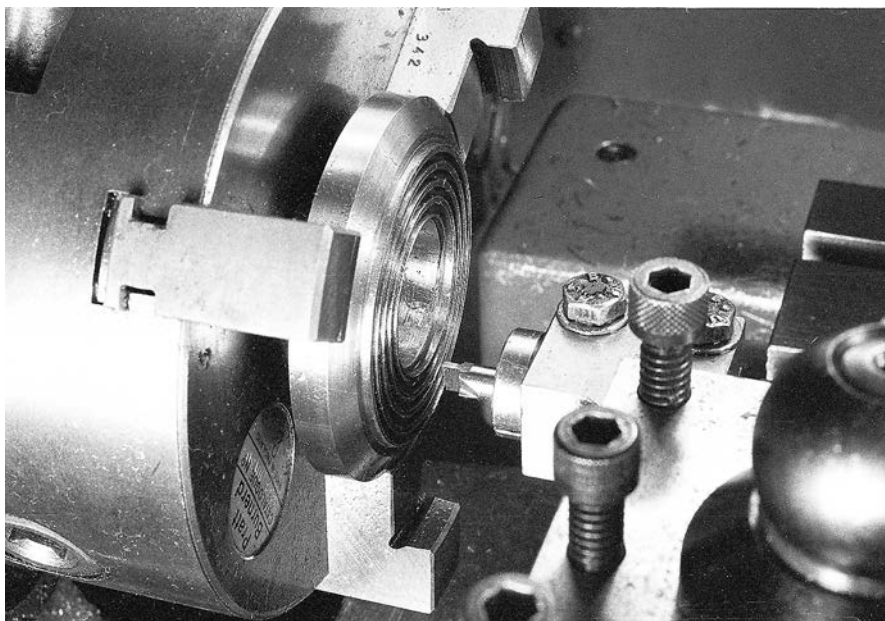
Cutting the scroll on the Myford Super 7 lathe using the author's own-design power cross-feed attachment (Figure 9)
